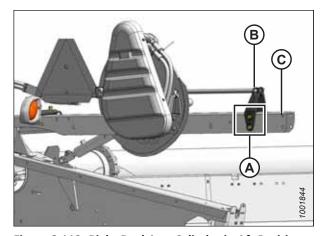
Right Reel Arm Cylinder in Aft Position
